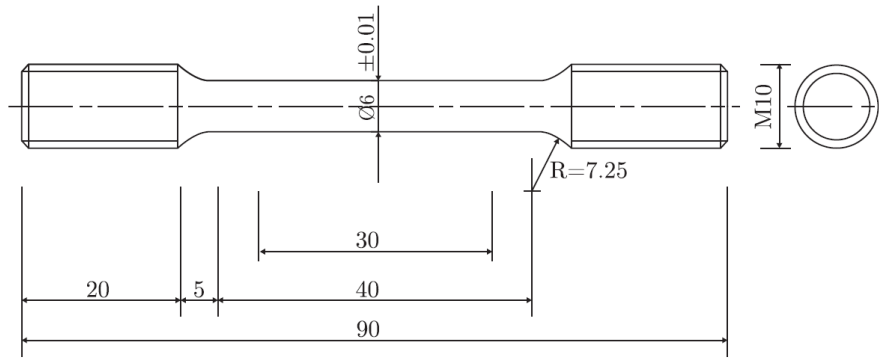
Geometry of the tensile specimen (dimensions in mm).
